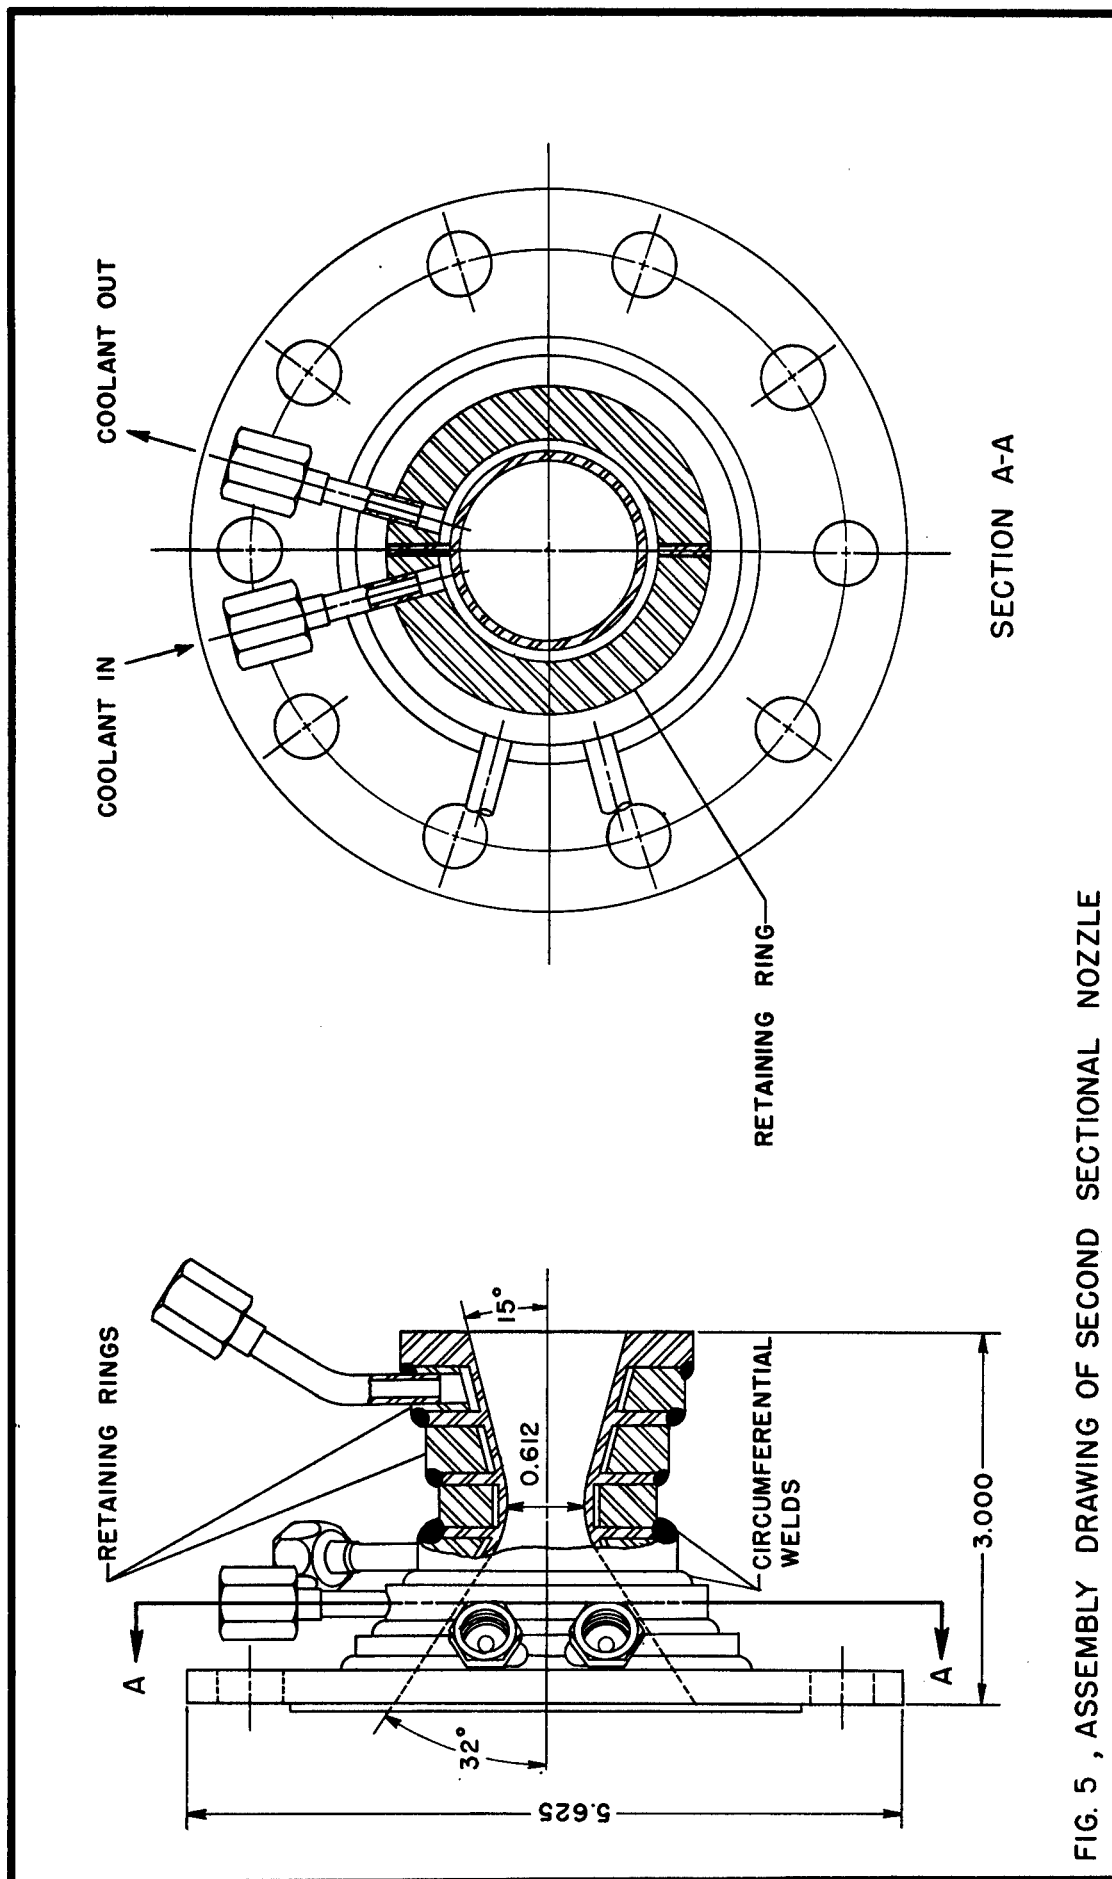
, ASSEMBLY DRAWING OF SECOND SECTIONAL NOZZLE
